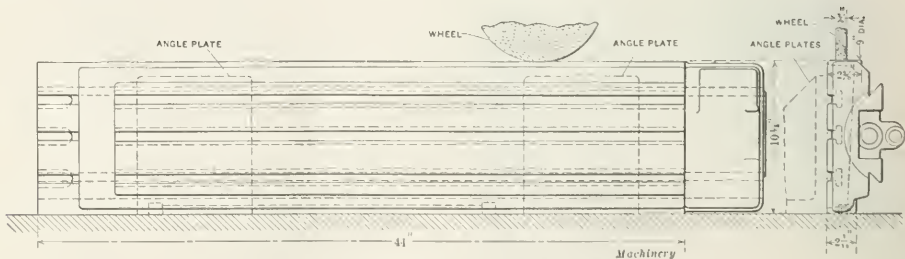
Method of grinding Both Edges of a Milling Machine Table
